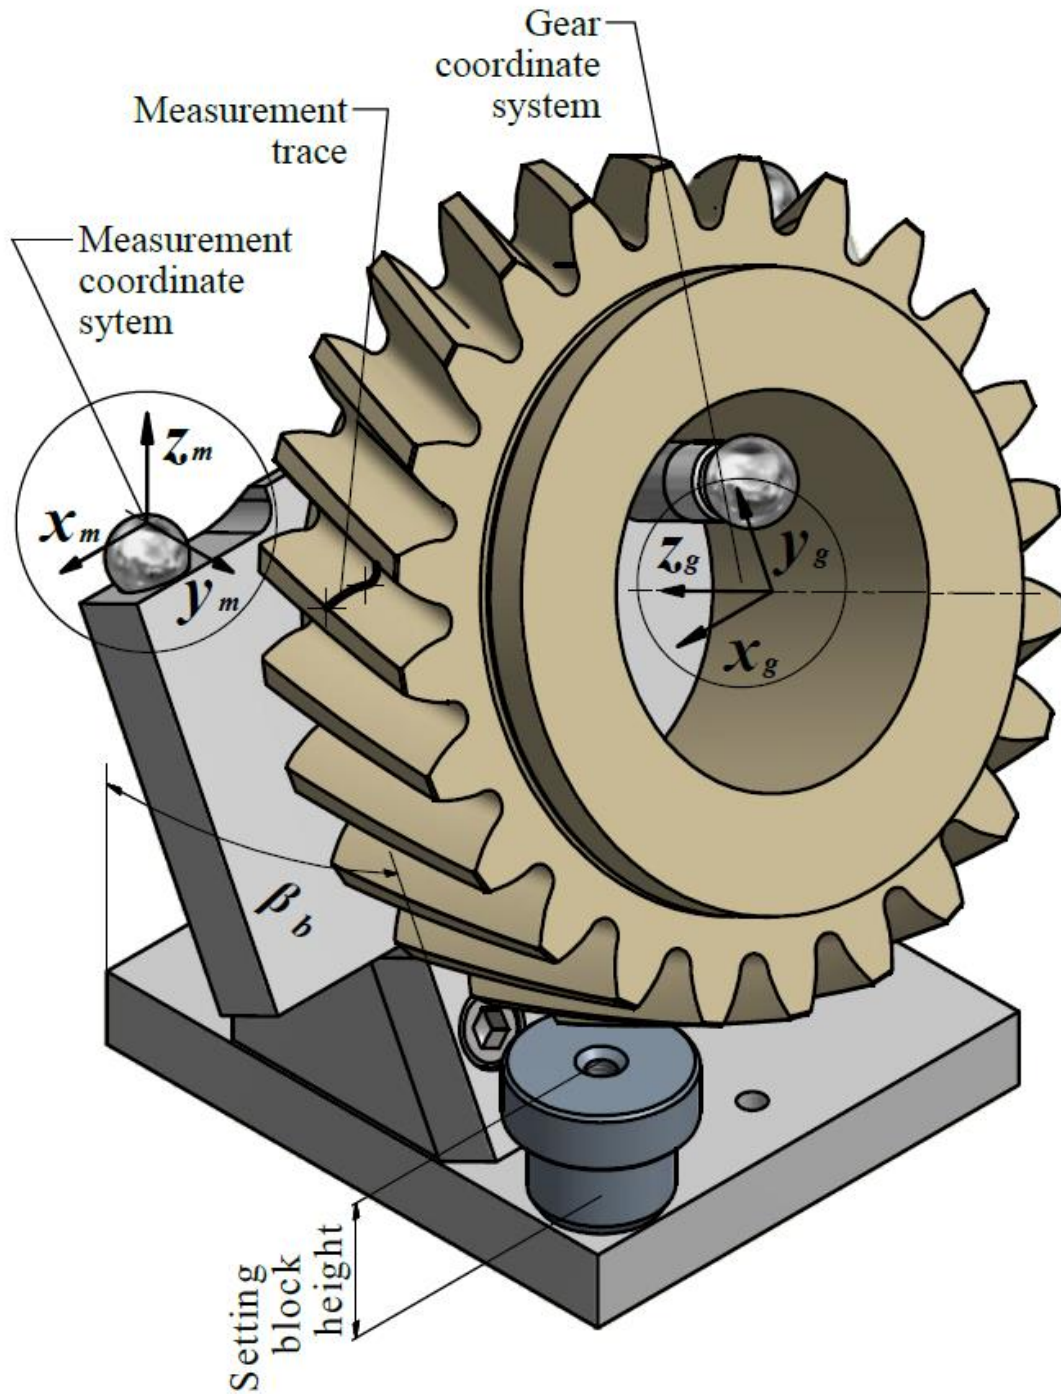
Gear alignment fixture CAD model as illustrated in reference [6].
